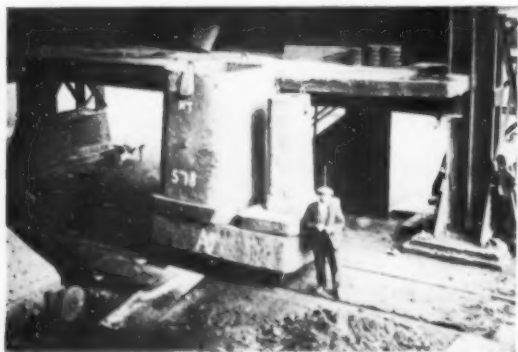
Showing 2-ton and 25-ton moulds in casting position.
